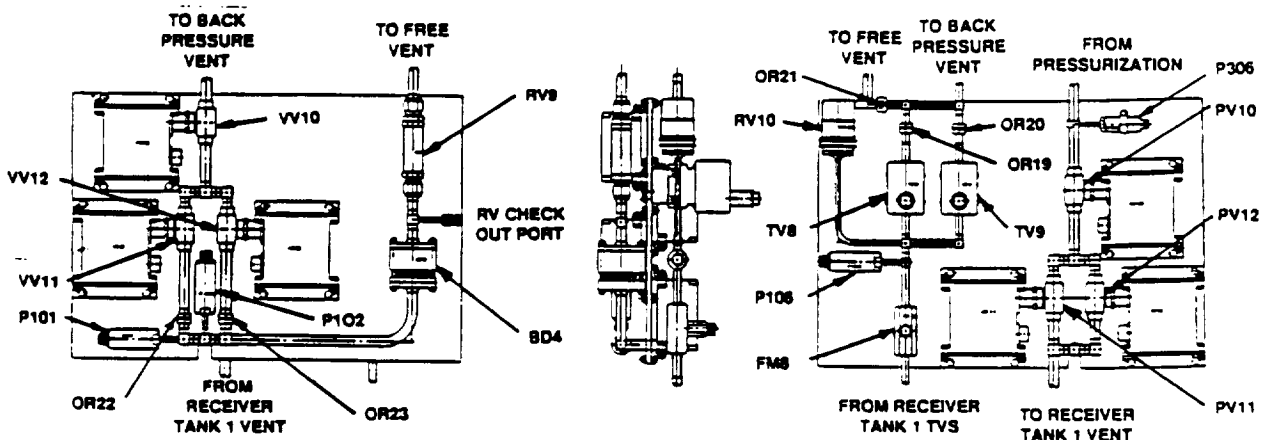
Valve Panel 6 Equipment Design Configuration
